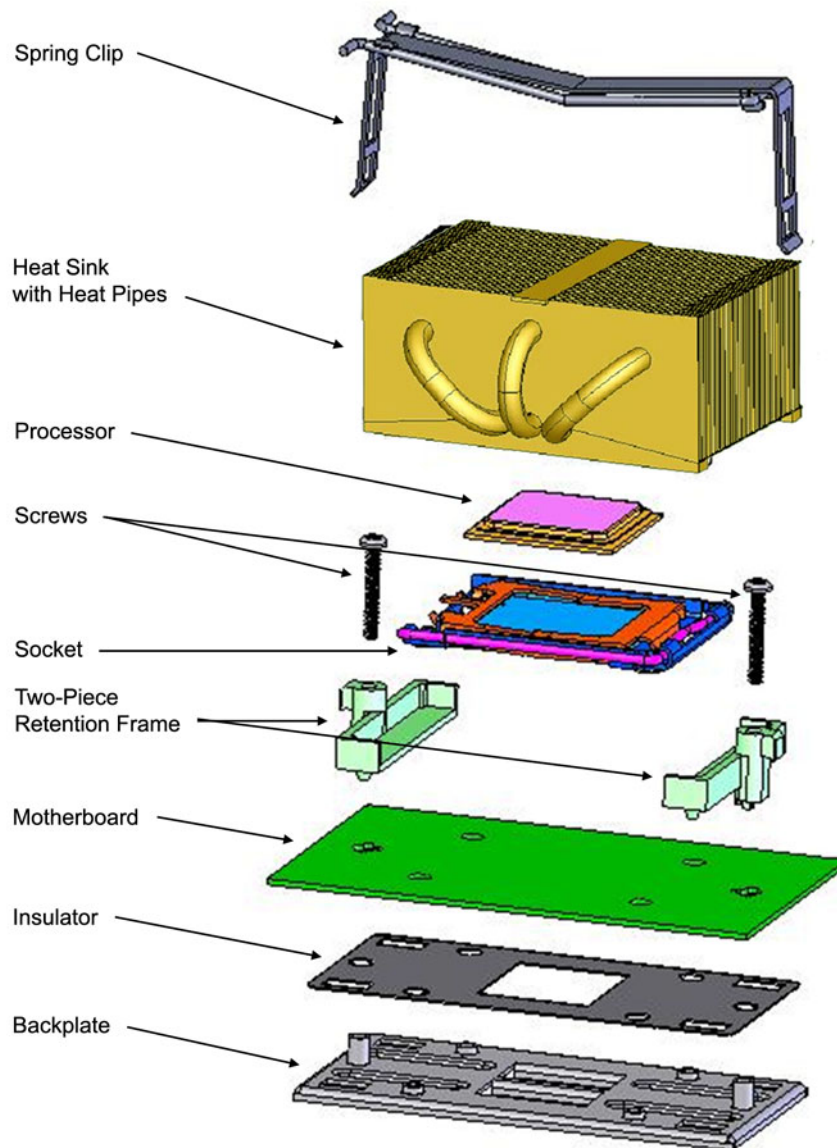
Exploded View of Thermal Solution for Custom 2U-4P System Based on Socket F (1207) Processors
